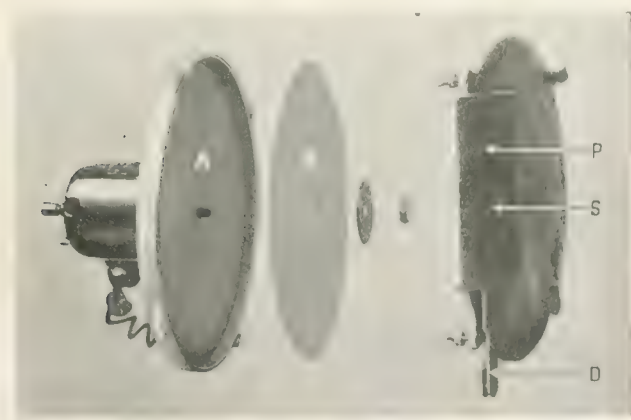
EXPLODED VIEW OF FILM HOLDER
